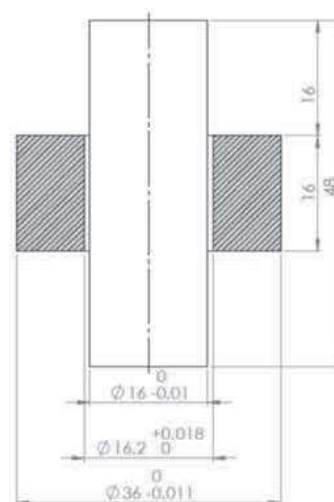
Dimensions and shape of the cylindrical adhesive joints
